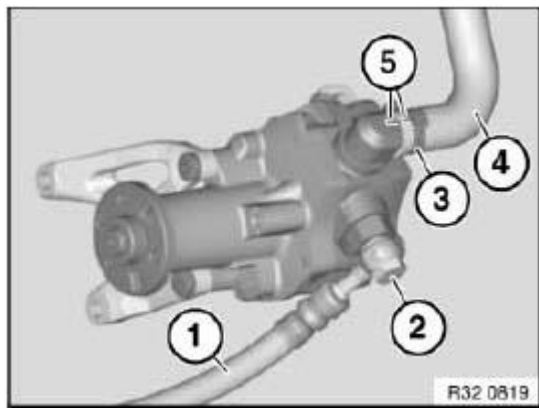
Identifying Banjo Bolt, Pressure Line, Hose Clamp And Suction Line
